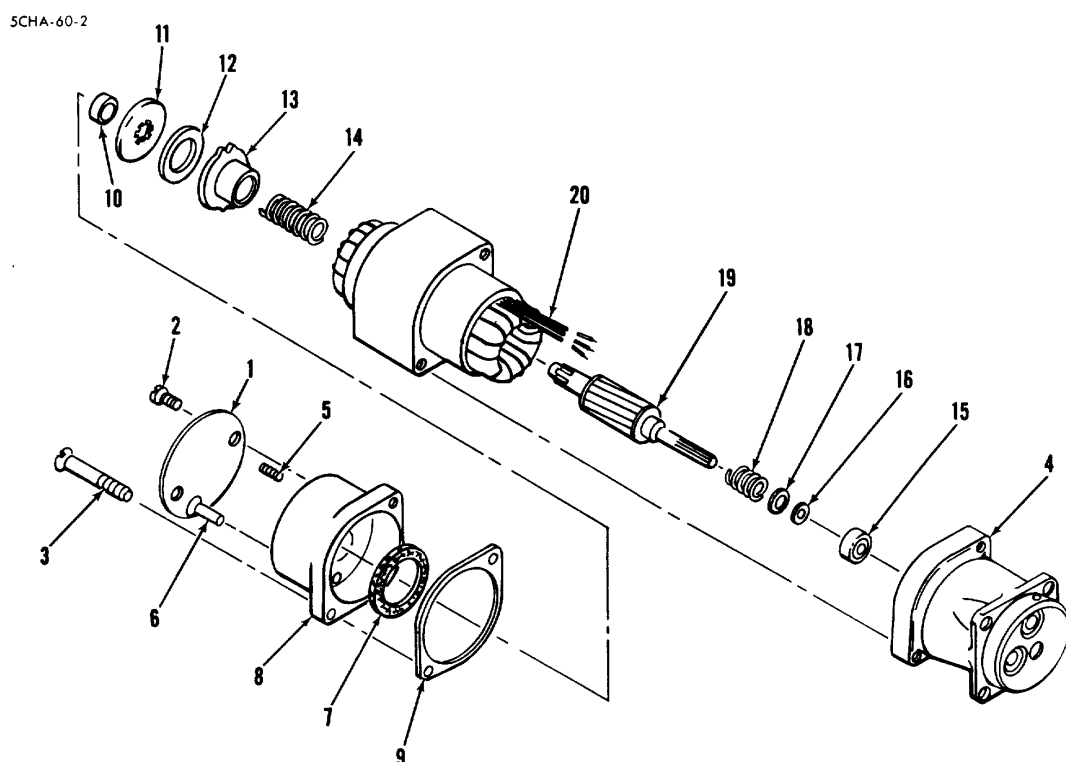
Electromechanical Linear Actuator, 541928-1-1 Exploded View (Sheet 1 of 3)
